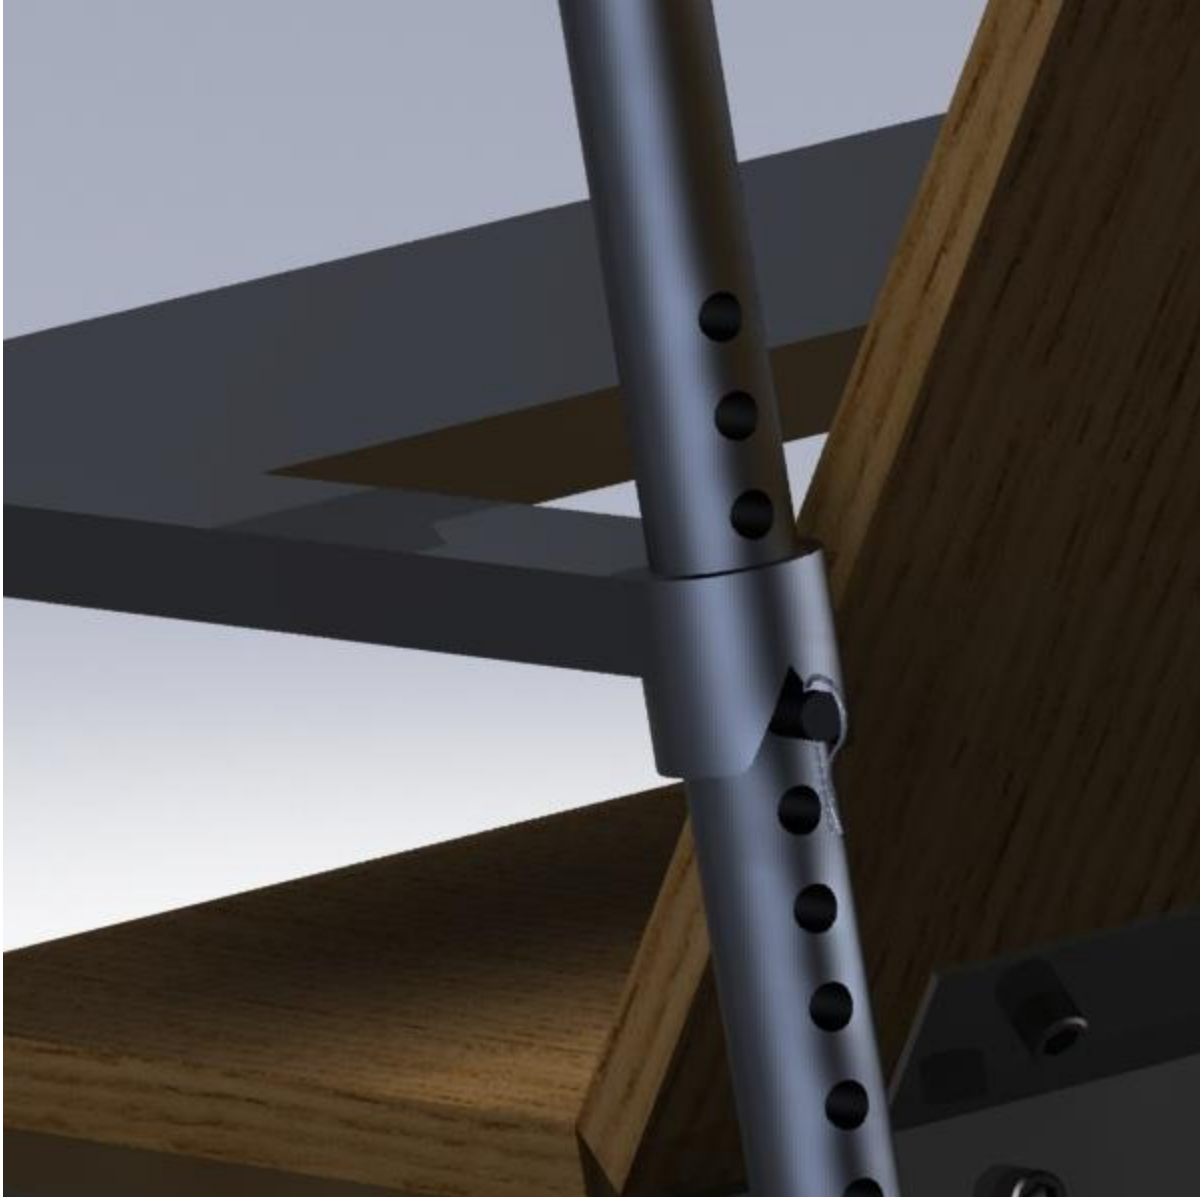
Detail view of the keyboard and mouse tray locking mechanism in the final assembly.
